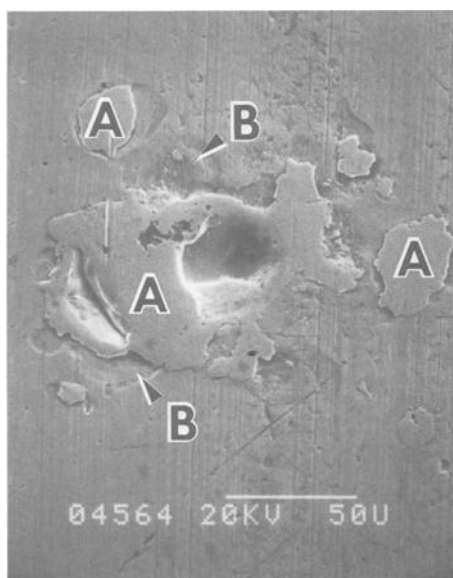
Surface pit in roller showing the pit partly filled with remelted metal and rolled in impressions in the surface.
